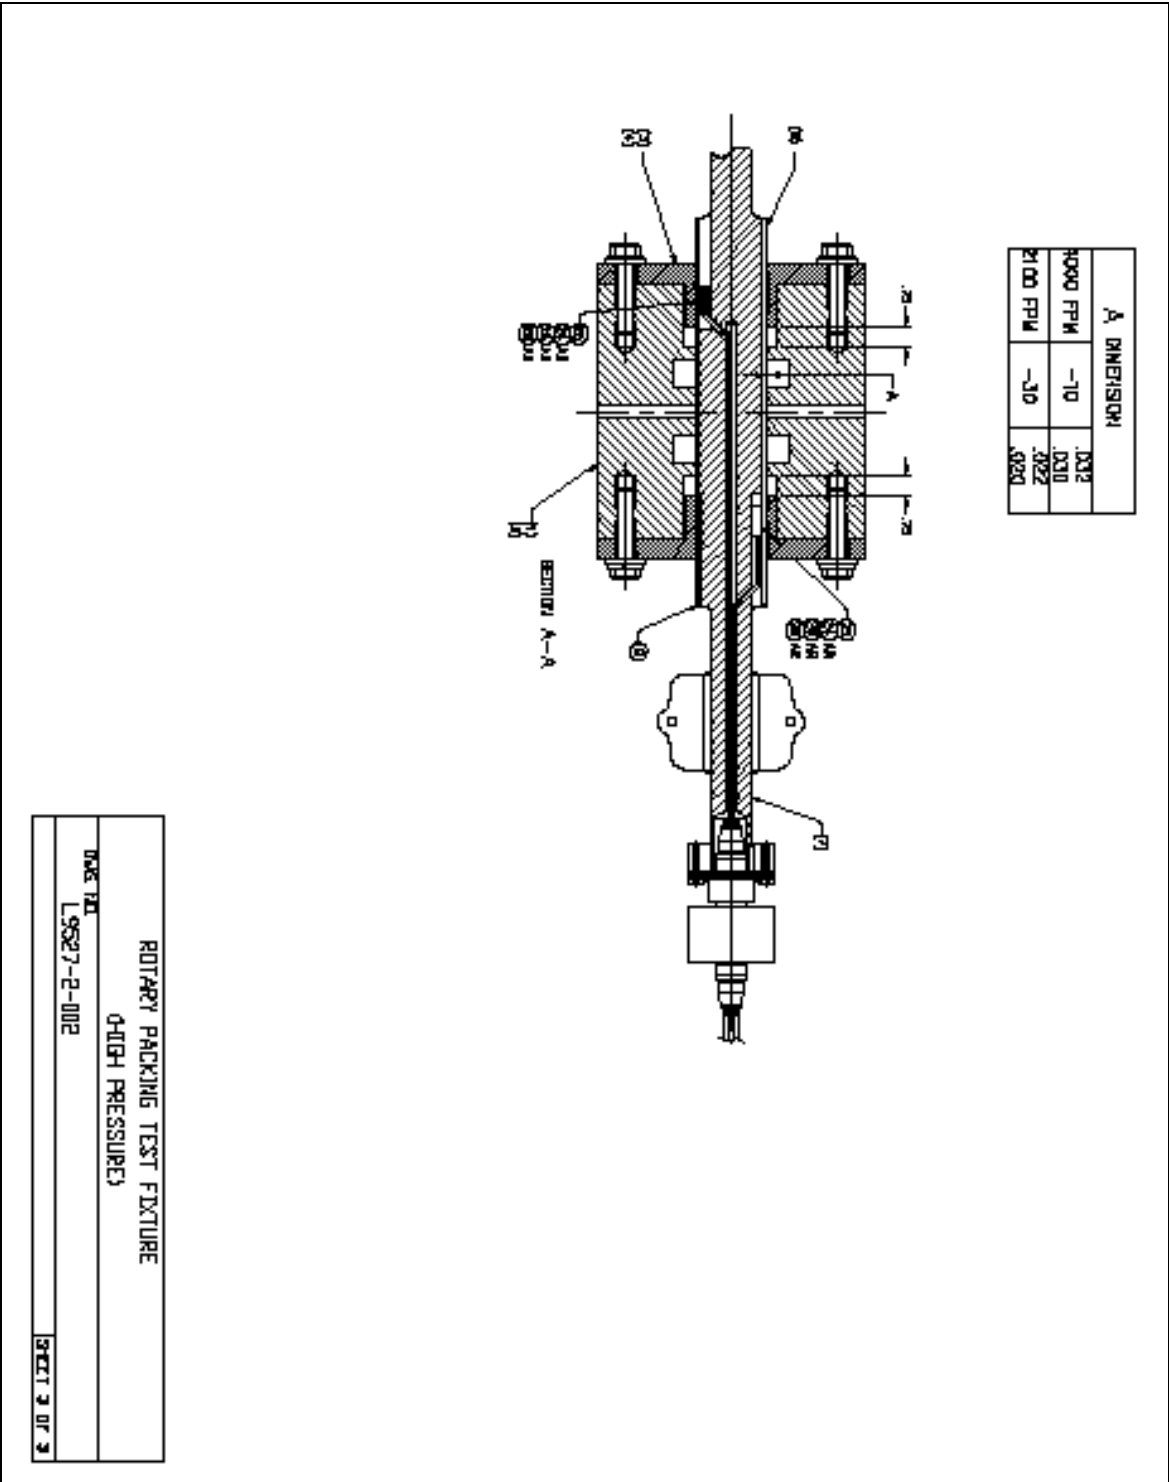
Rotary pump test device. (Sheet 3 of 9)
